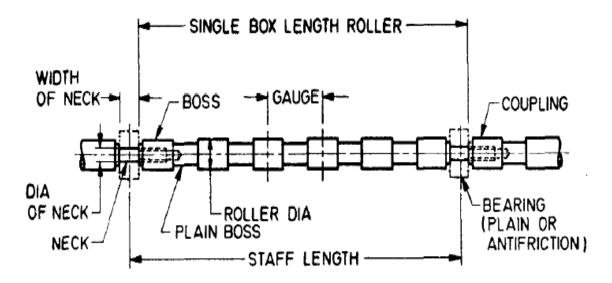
TYPICAL LAYOUT OF A BOTTOM ROLLER
